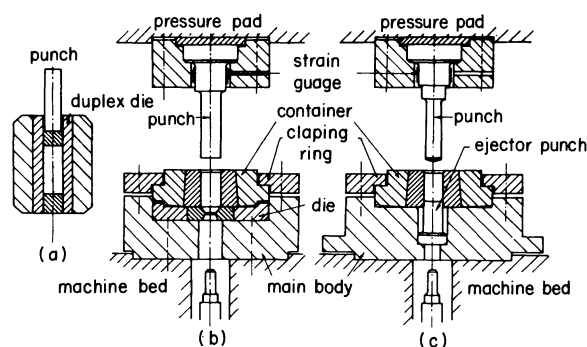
General layout of tooling: (a) compaction die; (b) forward extrusion die and (c) backward extrusion die.
